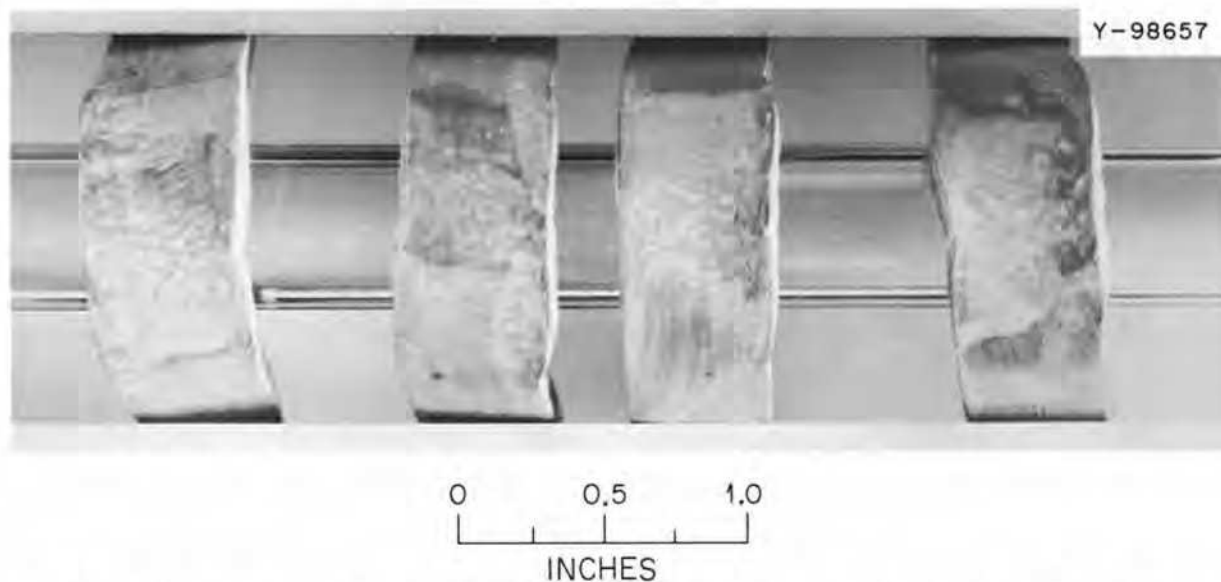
Side-bend specimens ( $\frac{1}{8}$  in. thick bent around a  $\frac{1}{2}$ -in. radius) of heat 70-727. The alloy was welded with filler metal from the same heat. Dye penetrant has been applied, and no flaws are visible.
